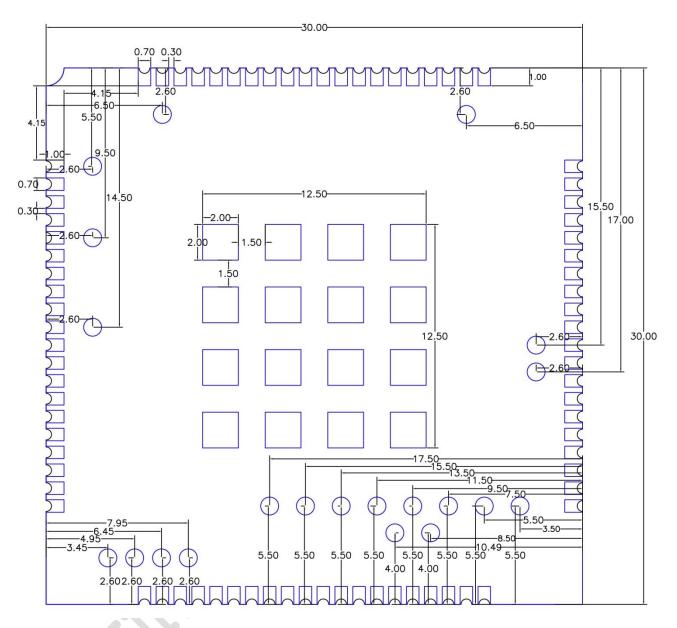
GM500_U1A Bottom Dimensions (perspective view)
